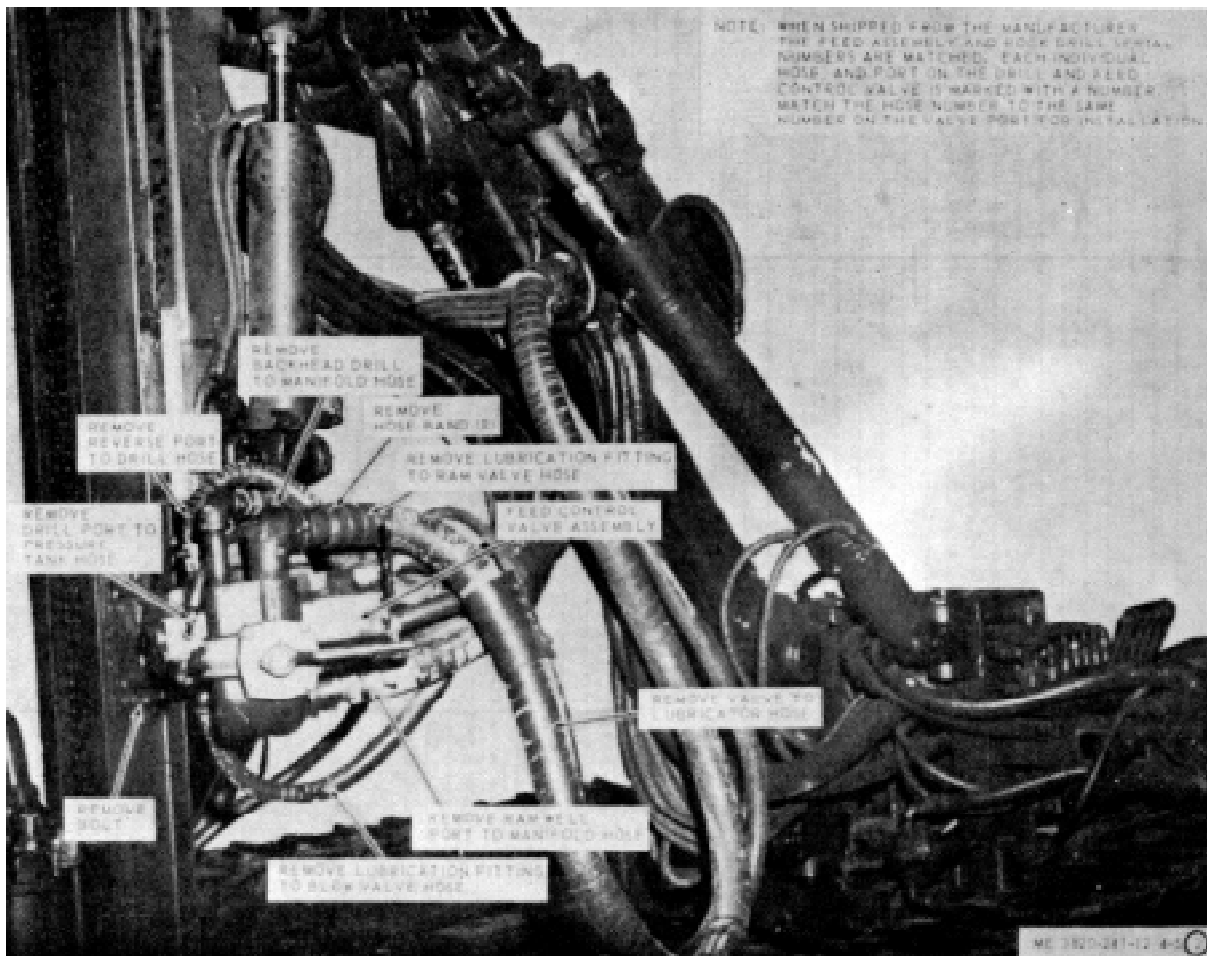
Drill and feel control valve, removal and installation (sheet 2 of 2).
